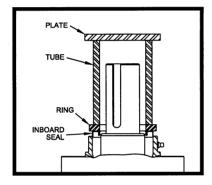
Placement of Tooling for Installation of Inboard Seal
